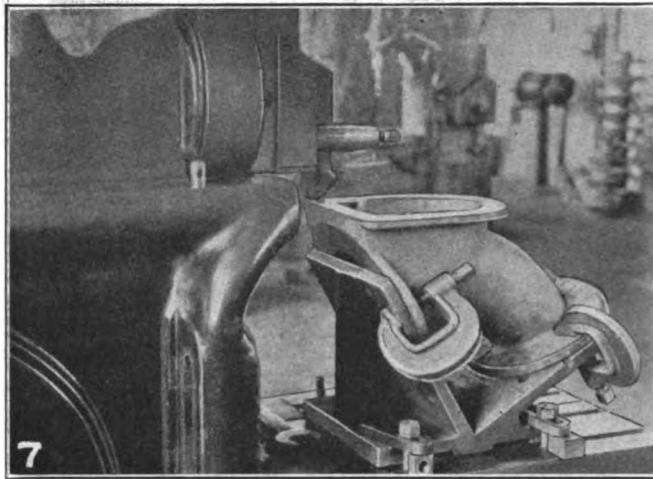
SHAPING COMBINED ELBOW CHECK VALVES.
